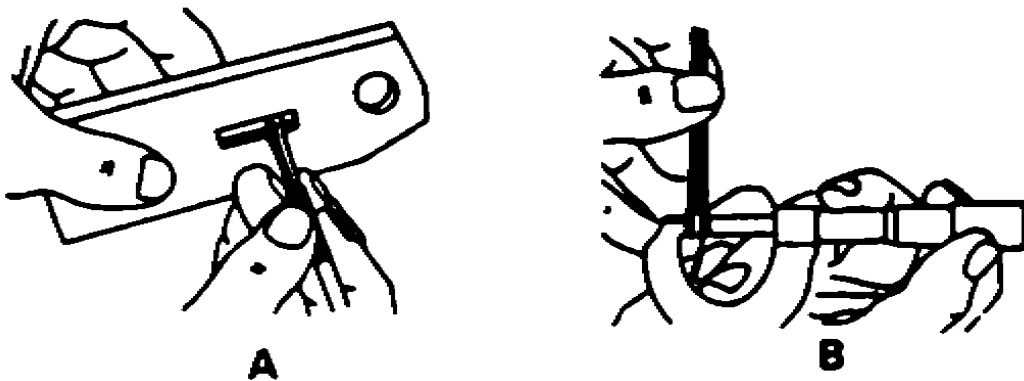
USING SMALL HOLE GAGE (PARTS A AND B)
